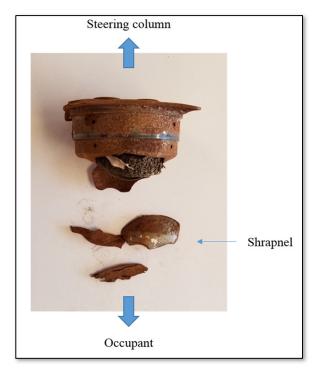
Photographs of Disintegrated Defective Takata Airbag Inflator Shrapnel Following Explosion
